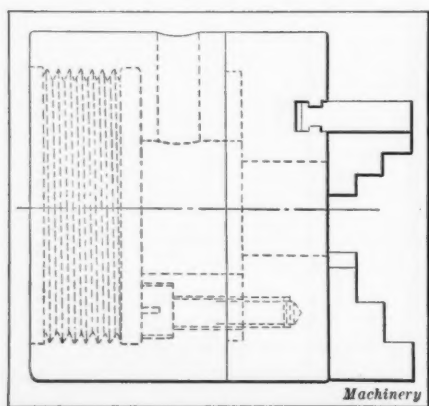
Adapter for fitting Small Chuck to Large Spindle
